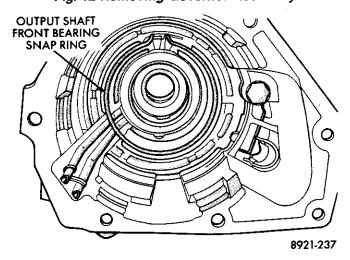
Removing Output Shaft Front Bearing Snap Ring
